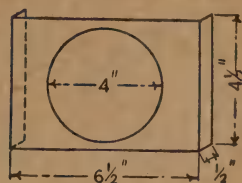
Tin Pressure Plate for Holding Slide Carrier in Stage
